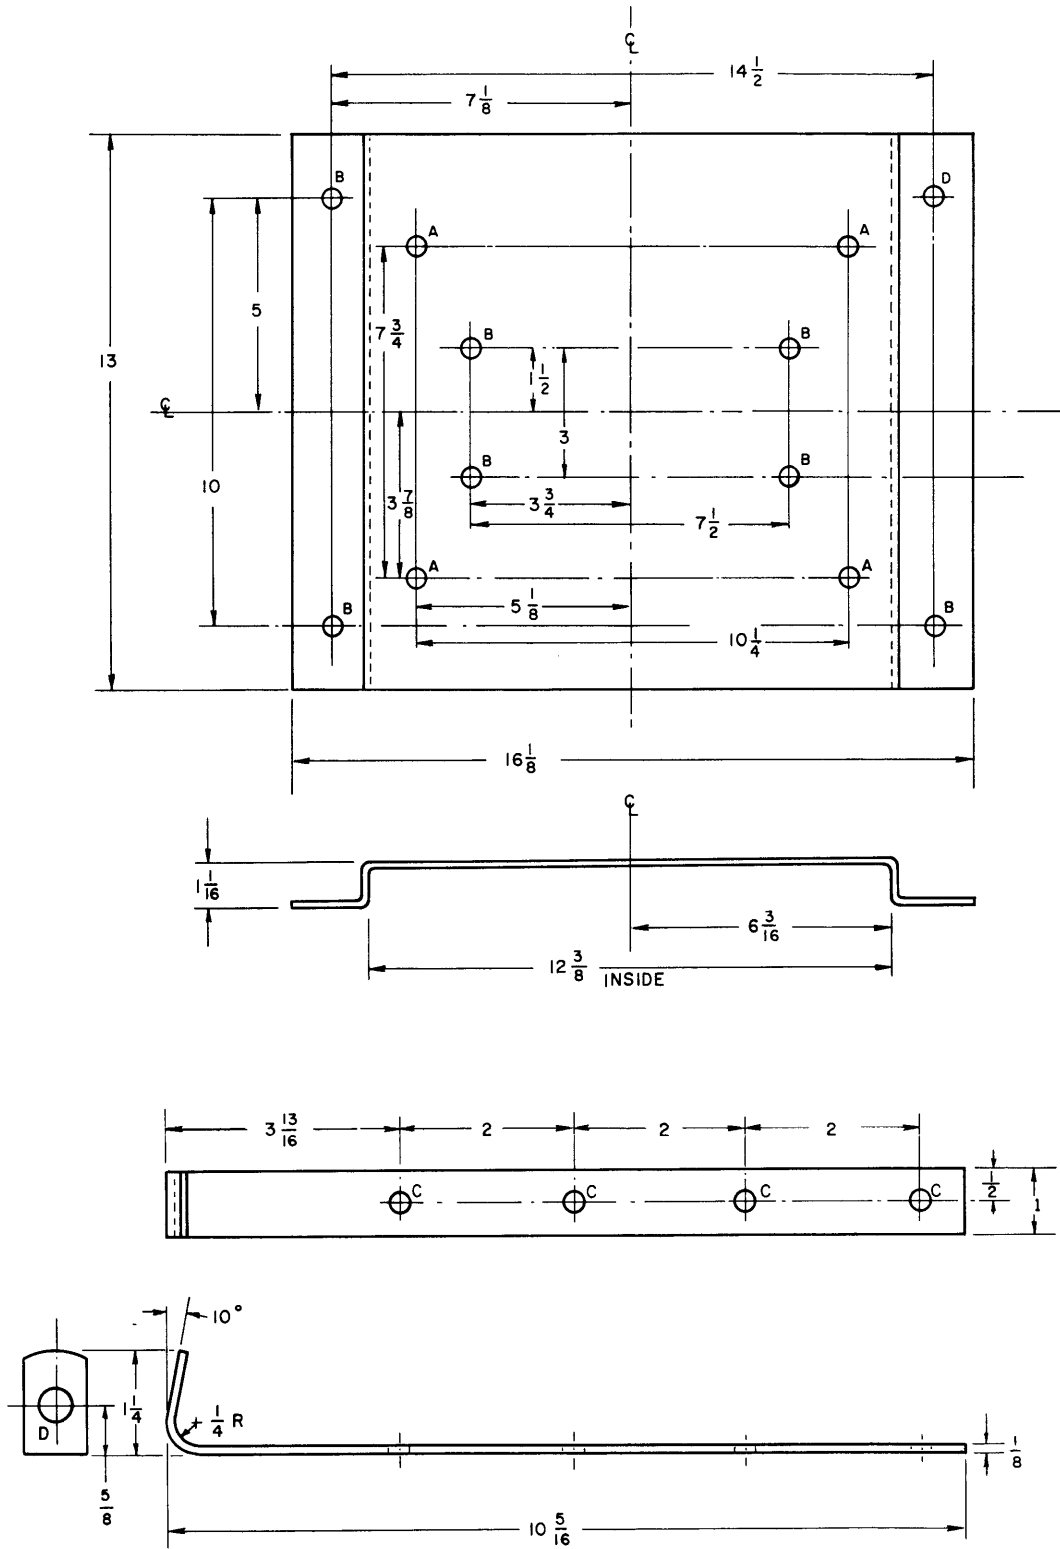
Roof, Wall, or Pole Mounting Dimensions, Installation Diagram (Sheet 1 of 2)
